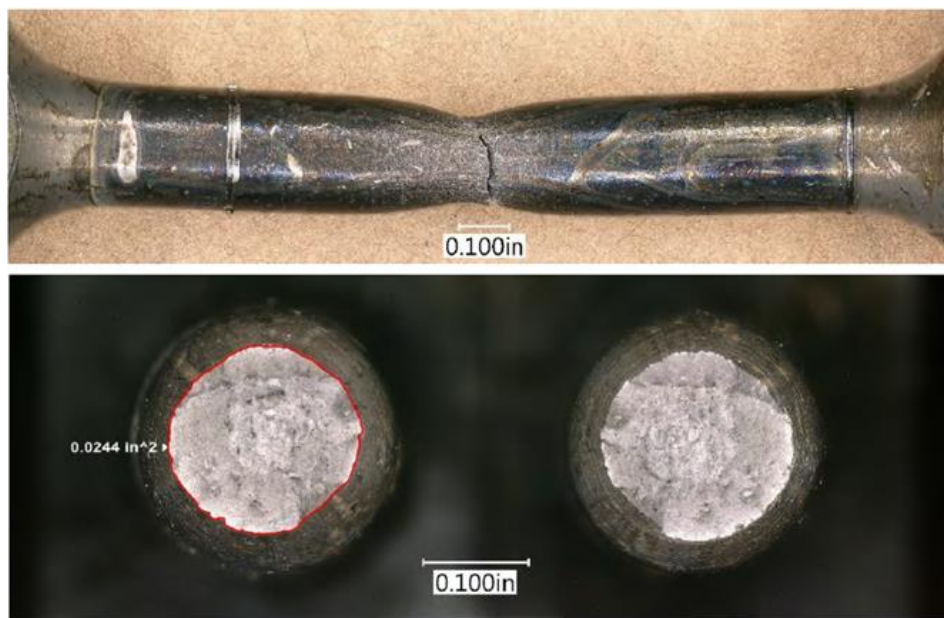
Photographs of Tested Tension Test Specimen QL-16 and Corresponding Fracture Surfaces – Base Metal Plate, Heat No. B4197-2, Longitudinal Orientation, 550°F
